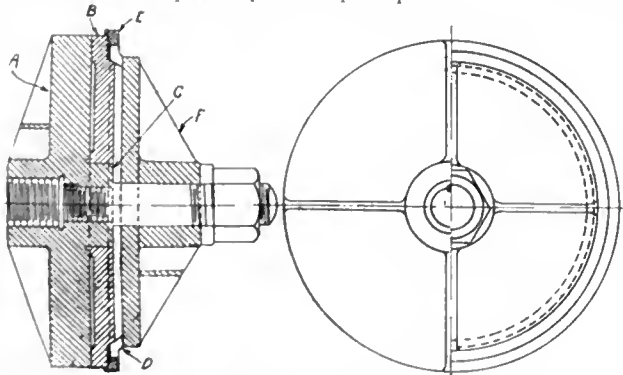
PISTON VALVE RING MACHINING—SECOND OPERATION.
